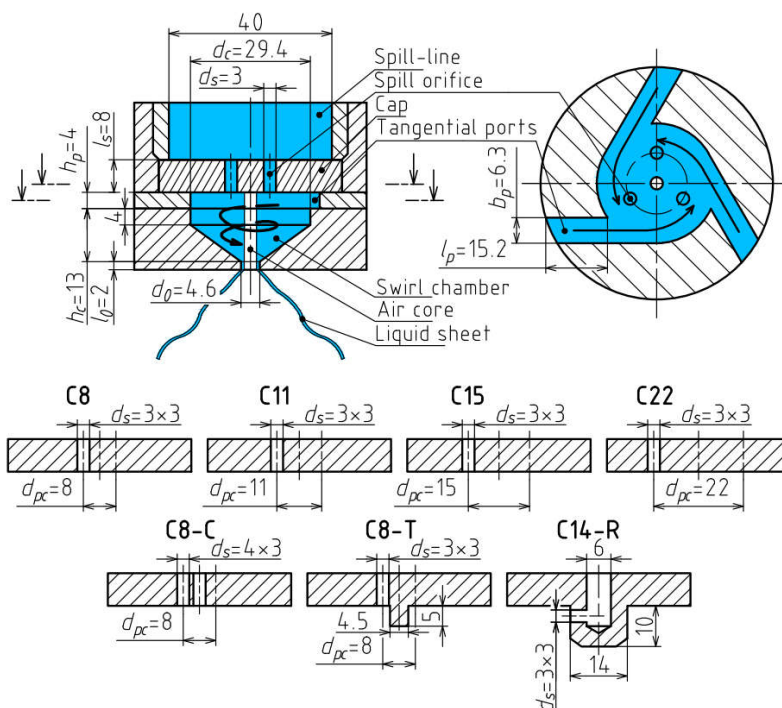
Top: Atomizer schematic drawing with main dimensions. Bottom: Geometry of tested caps.
